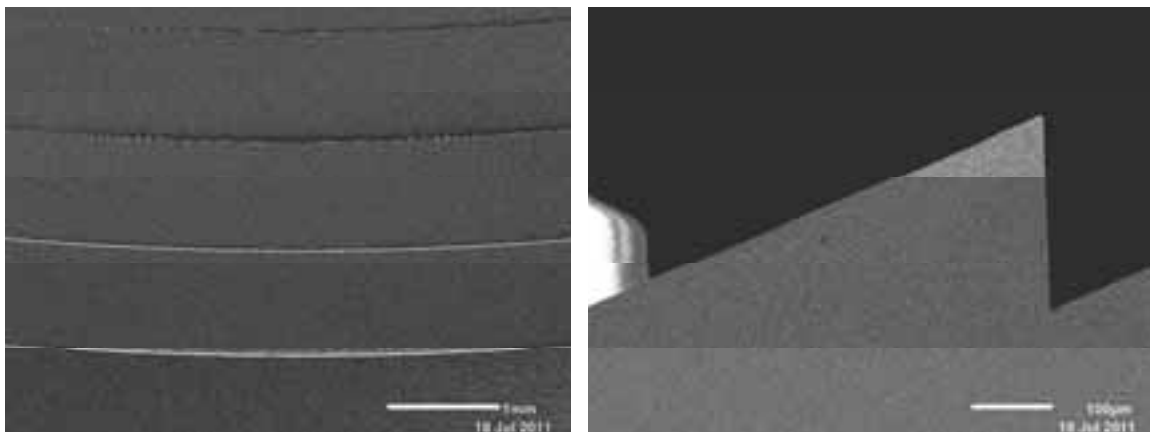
REM micrograph shows the hot-embossed PLEXIGLAS® film lens. Left side is the top view and right side the breaking edge - view of the cross section.
